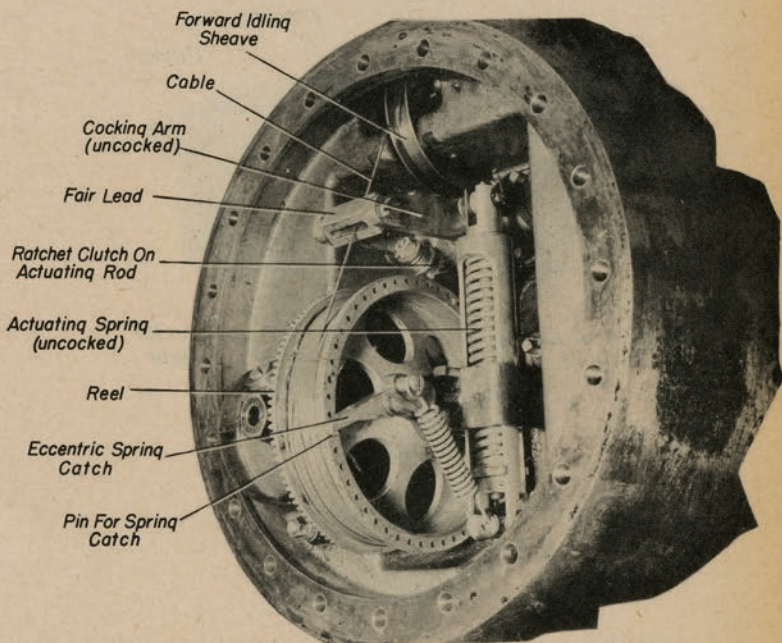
Type 3 Warhead (Nose) - Mechanism Uncocked
